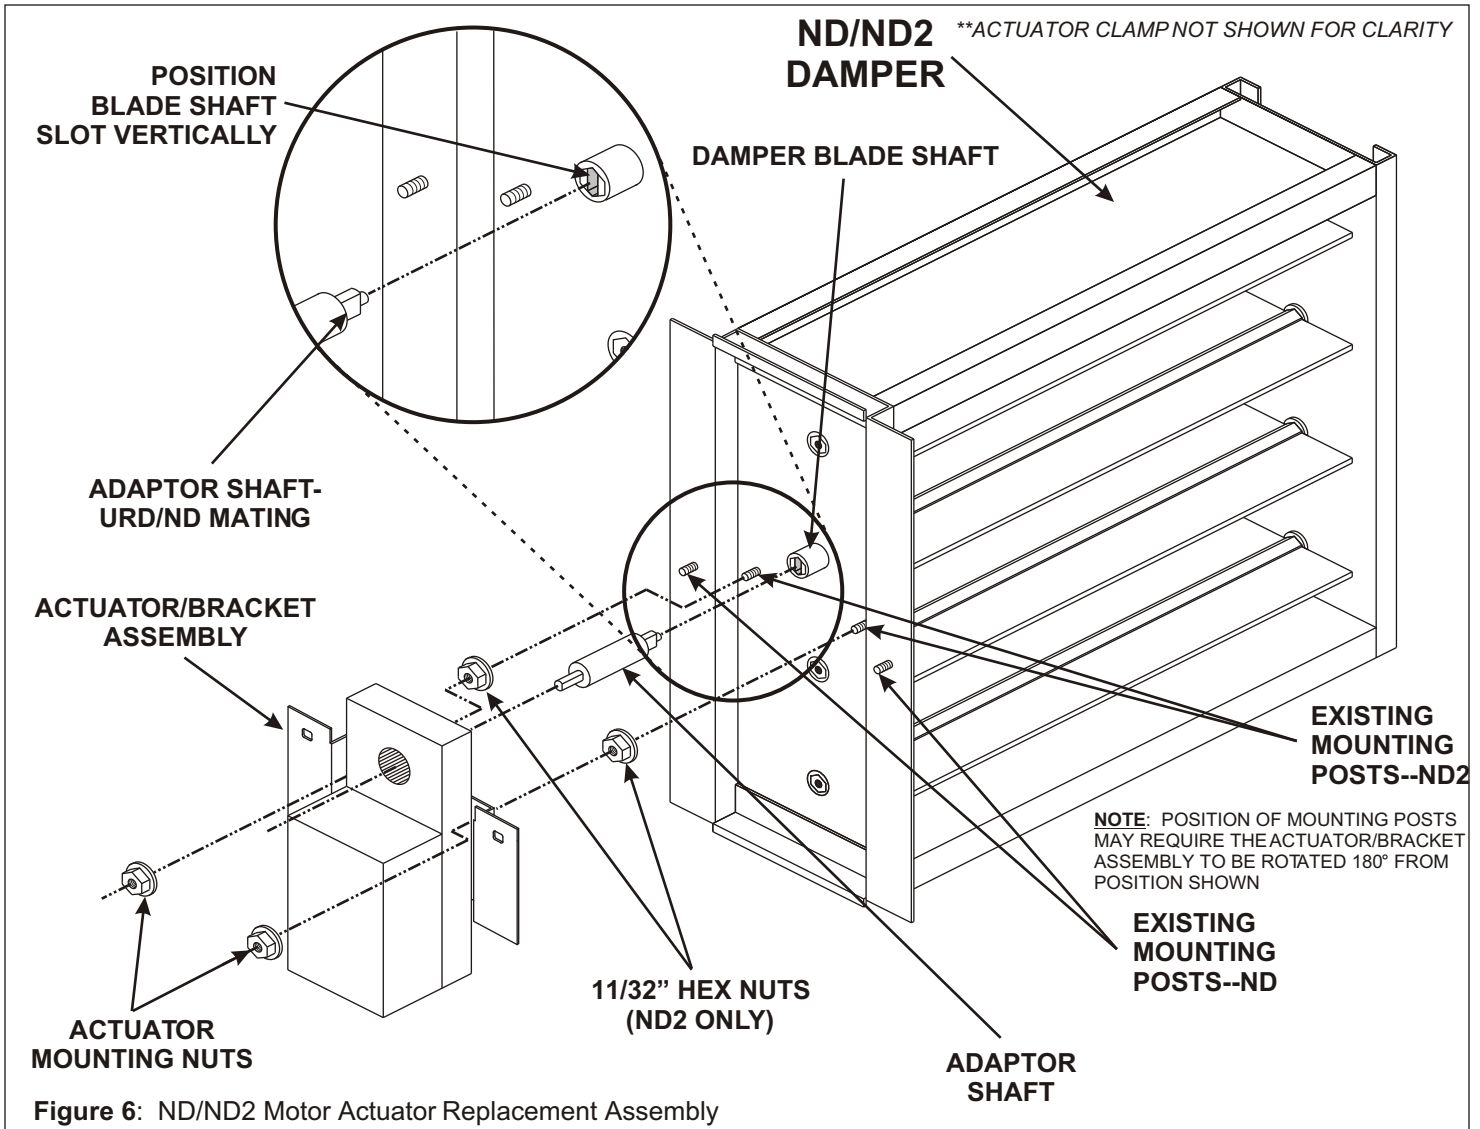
ND/ND2 Motor Actuator Replacement Assembly
